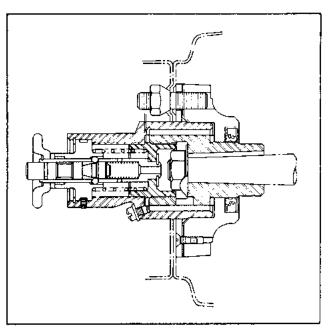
B-10A. Wheel Lockout Hub, Section View CAUTION
